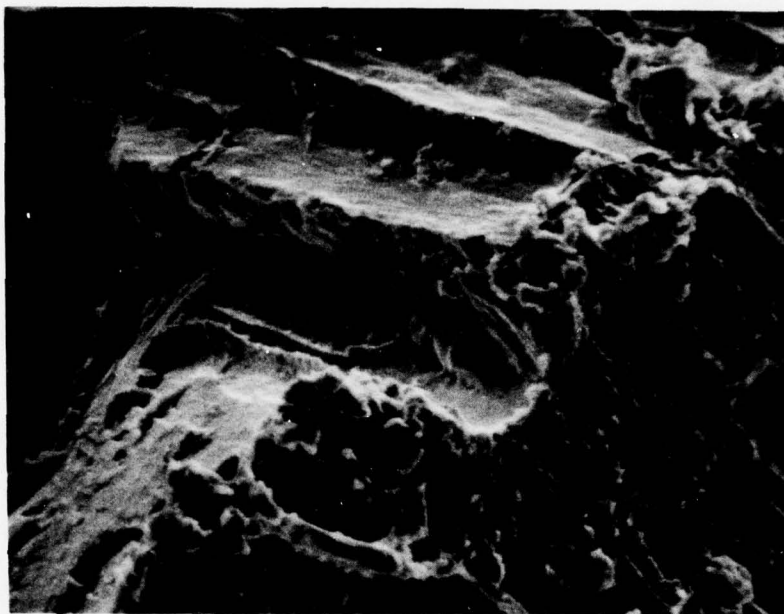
Sustained Load Crack Growth Fracture Surface of Specimen B-1-112
